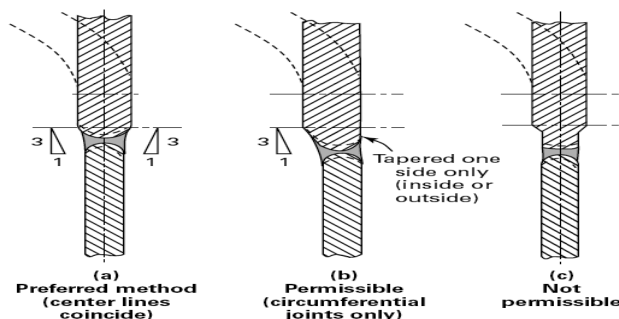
BUTT WELDING OF PLATES OF UNEQUAL THICKNESS
